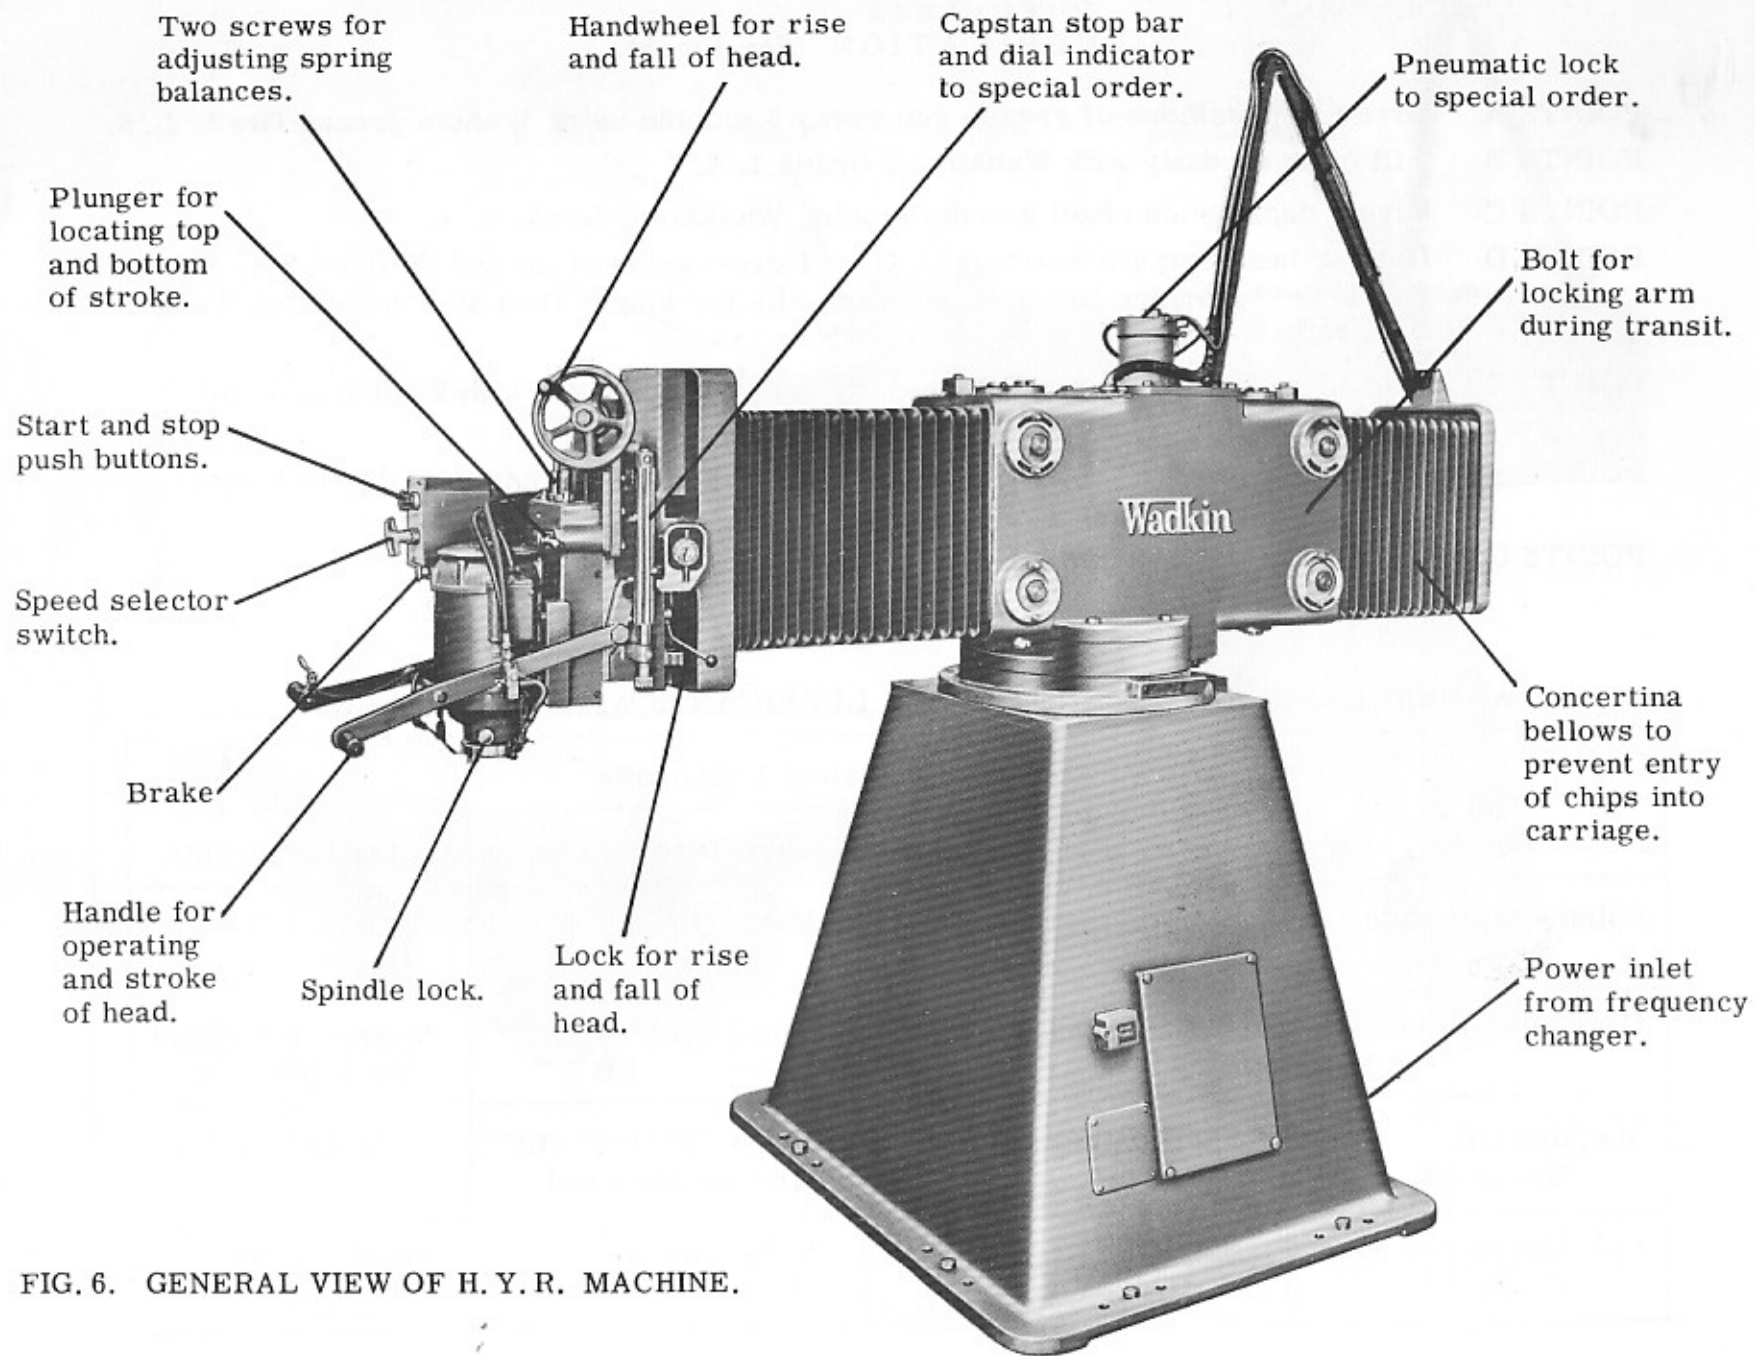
GENERAL VIEW OF H. Y. R. MACHINE.
